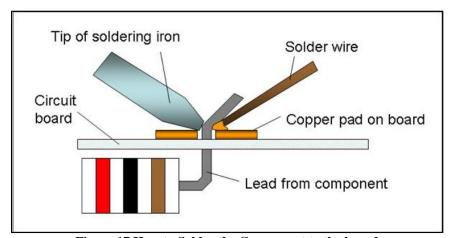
How to Solder the Component to the board .( http://www.cdn.sciencebuddies.org/Files/2084/5/Elec\_primer-solder2.jpg)
